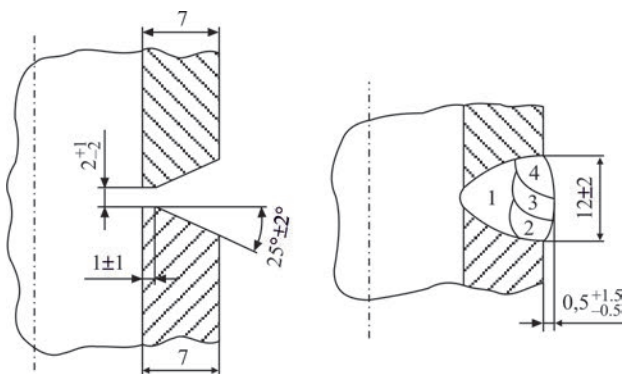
Preparation of edges of U-type for the welded pipe joint (SMAW) (a), arrangement of the weld passes (b)
